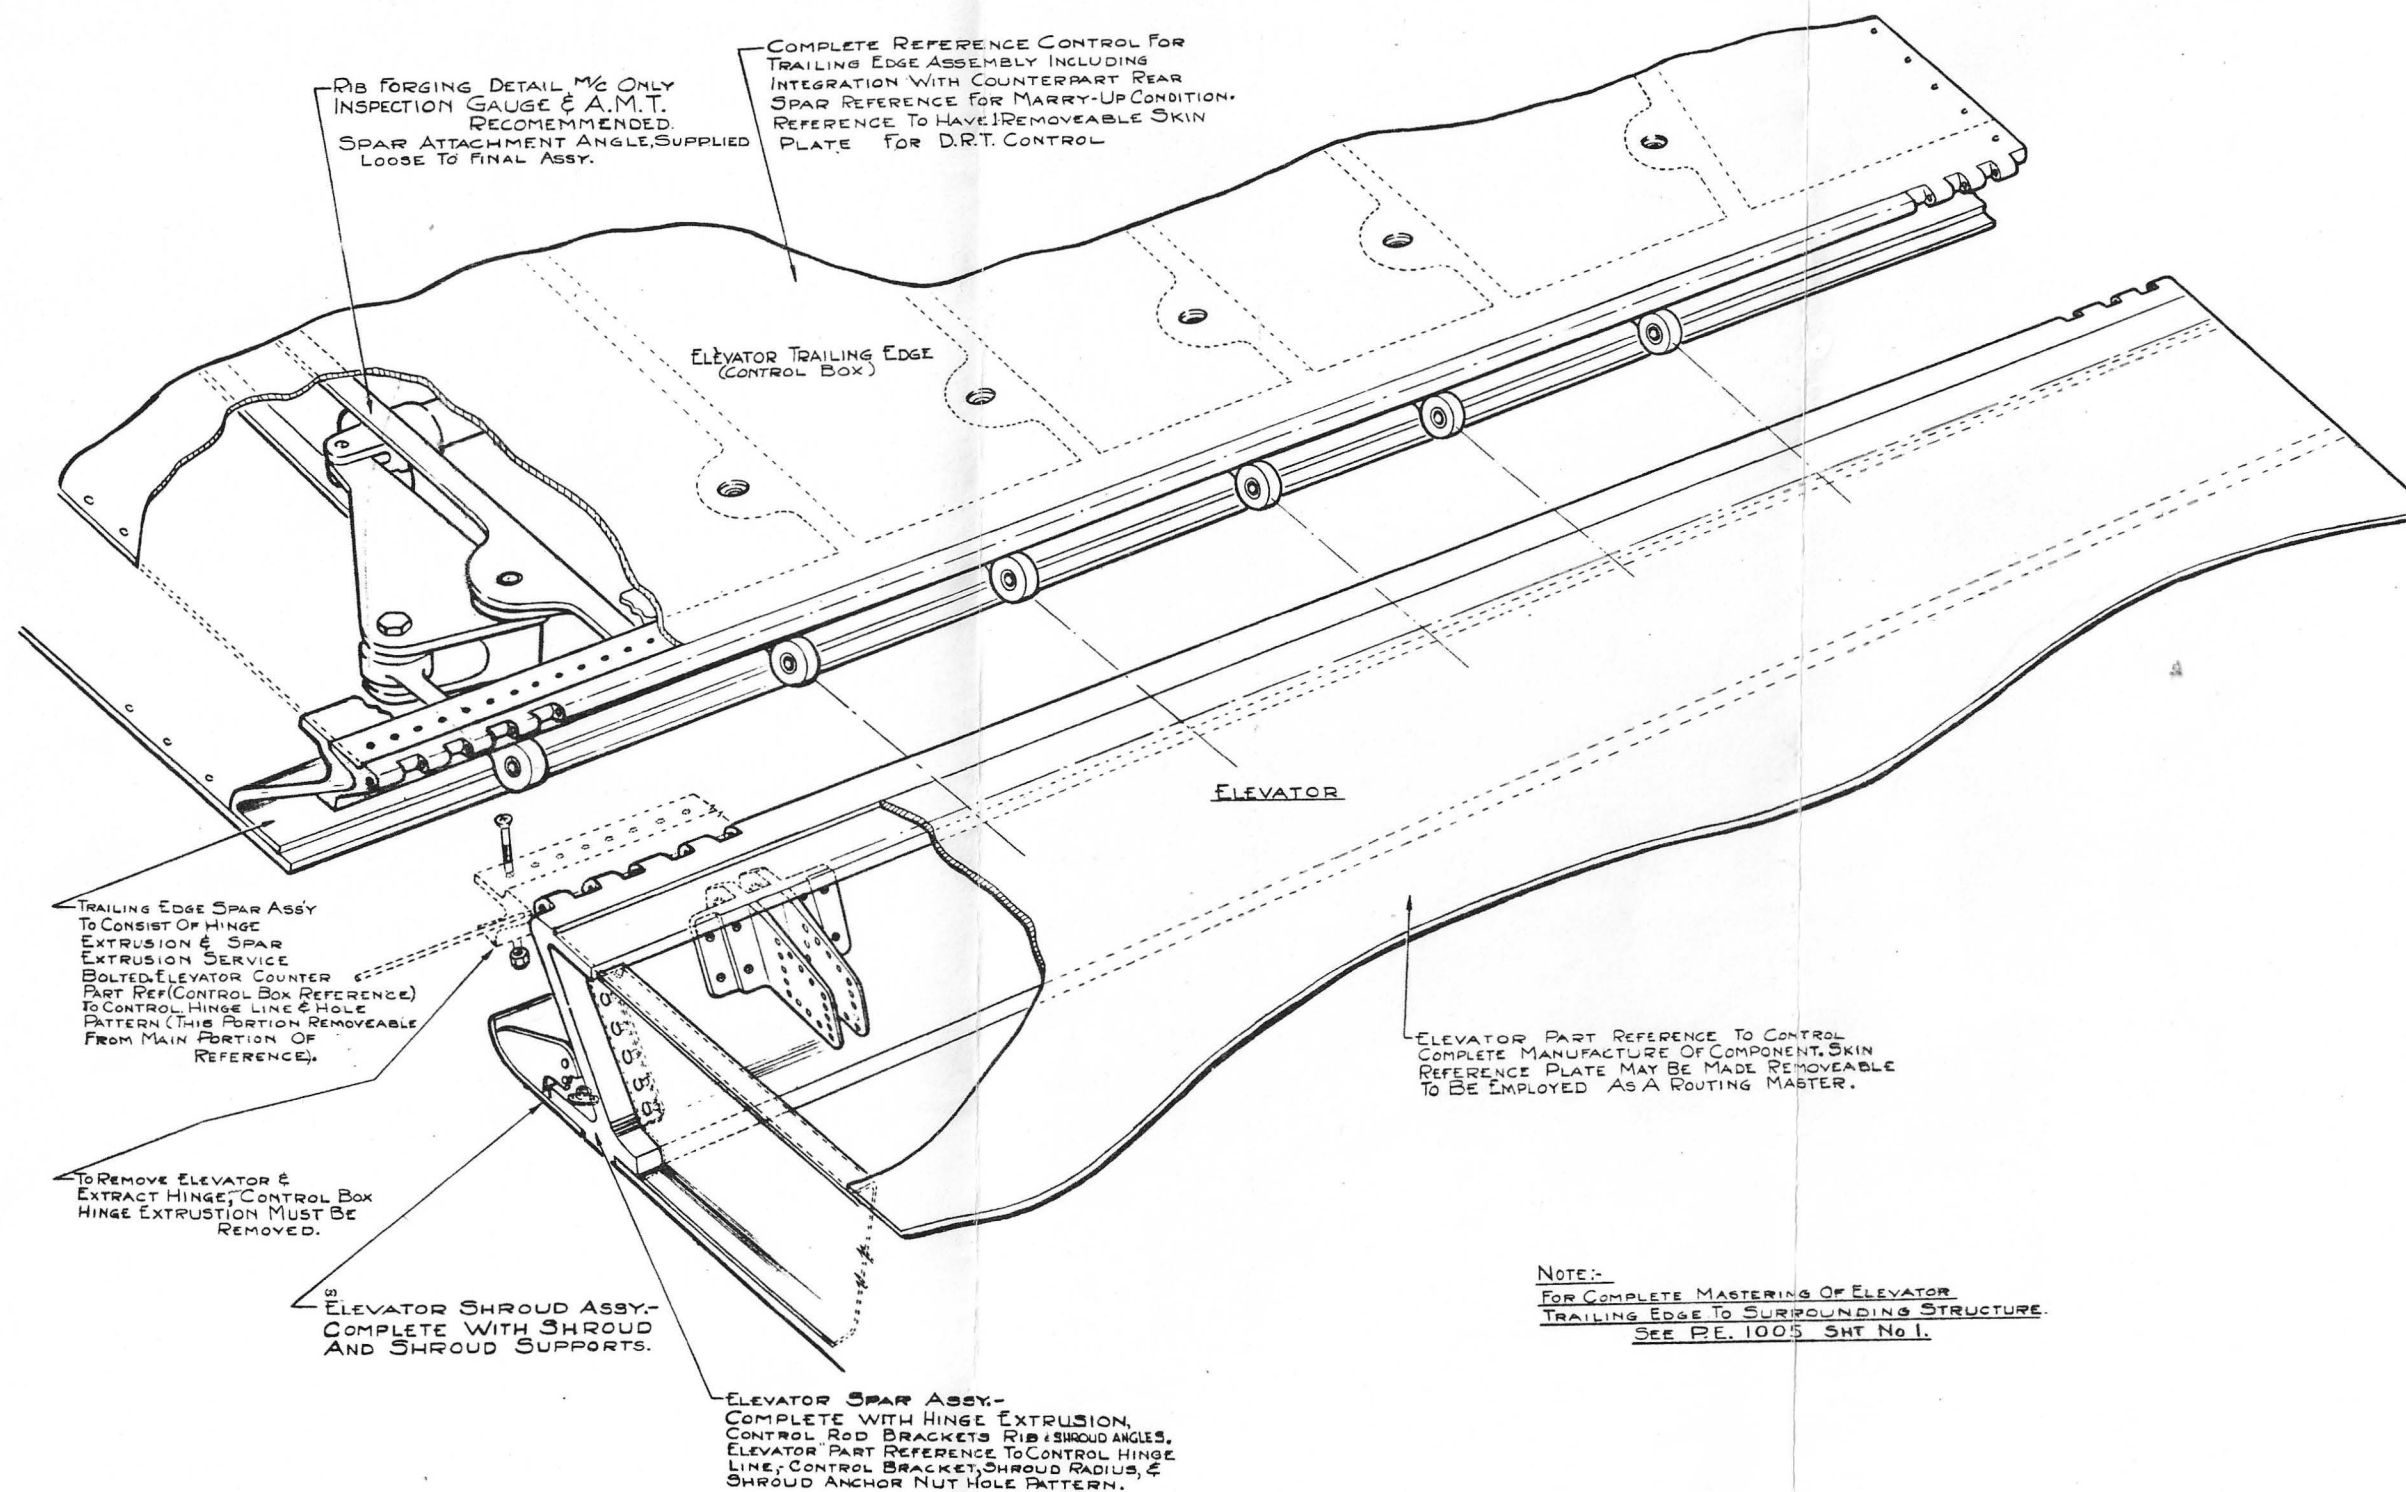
C-105 WING - INTERCHANGEABILITY - ELEVATOR TRAILING EDGE TO ELEVATOR
